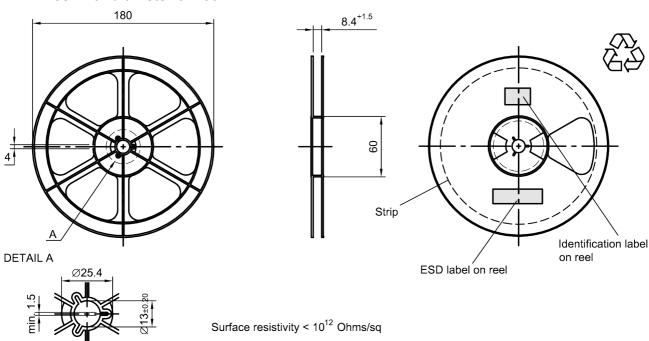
Drawing of reel (first-angle projection) with diameter of 180 mm.
